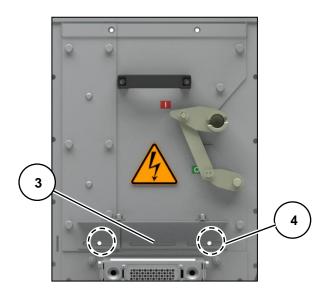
Contactor panels with panel width 435 mm only: 2 bolted joints on the heater support
